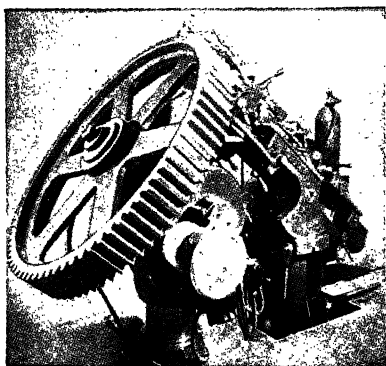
Gleason surface-hardening machine set up for hardening the teeth of a large spur gear.
